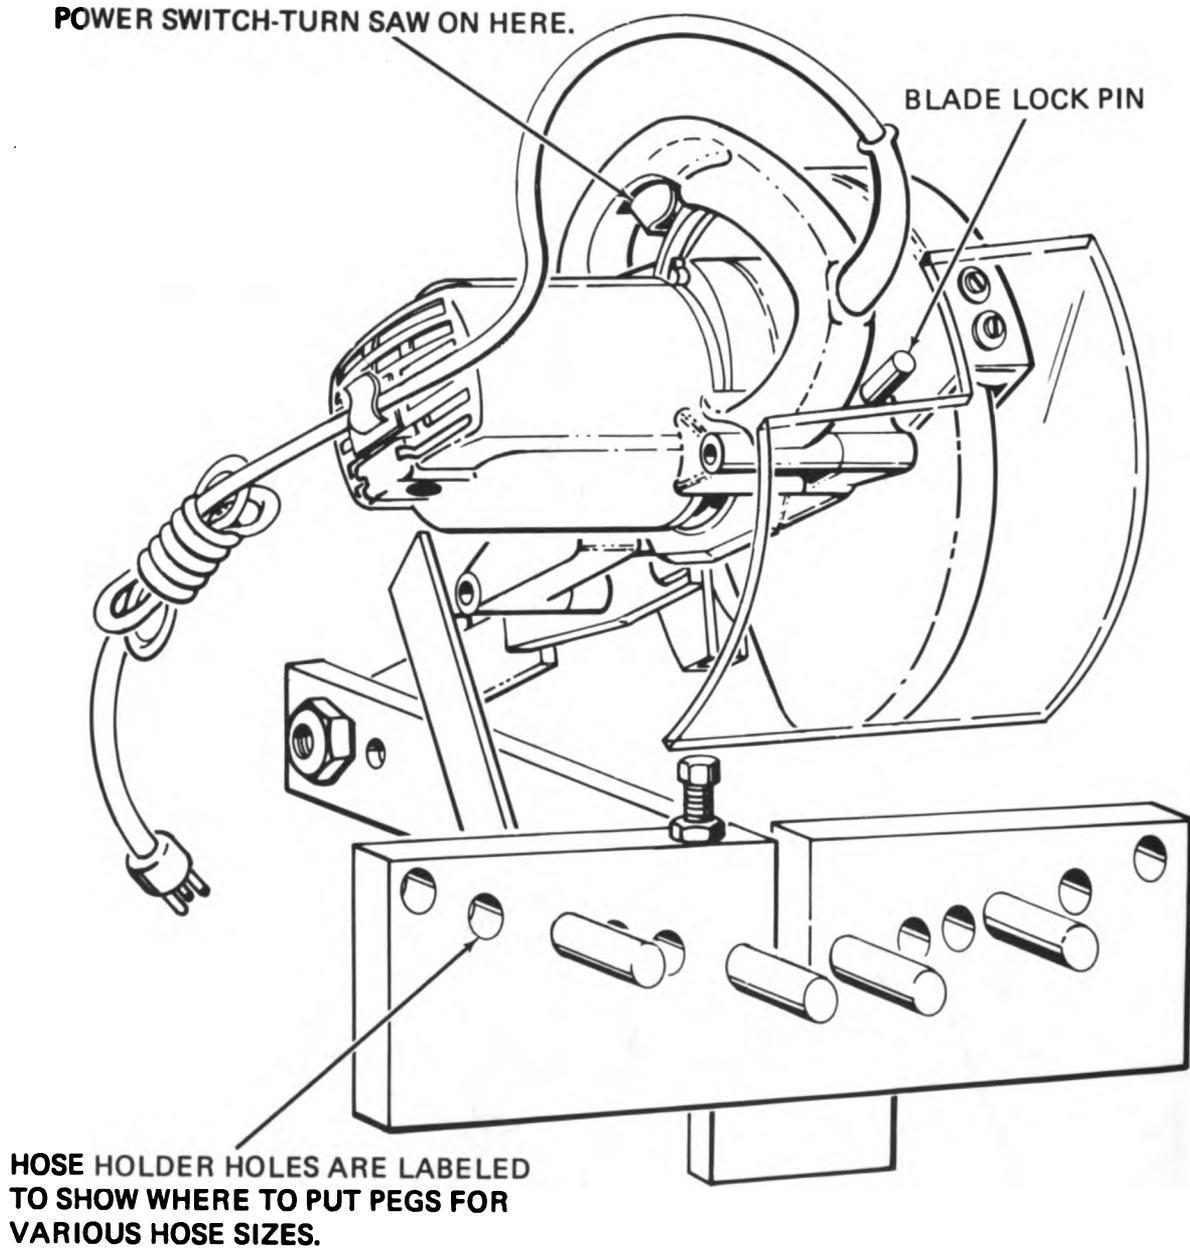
Hose Cutter Power Switch and Blade Lock Pin.
